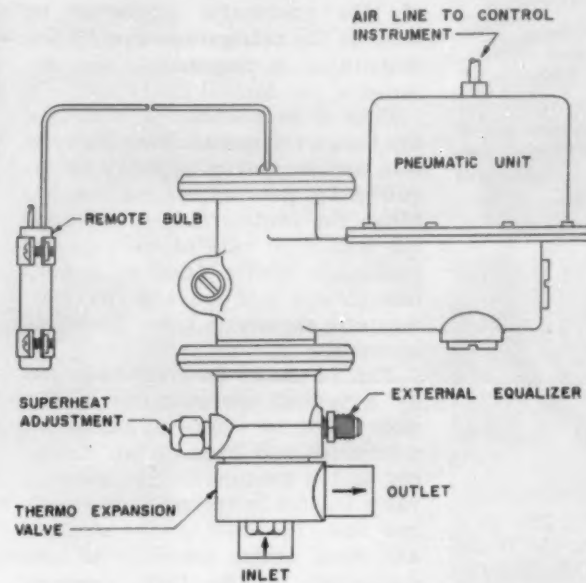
is a thermostatic expansion valve equipped with pneumatic over-ride modulation.
